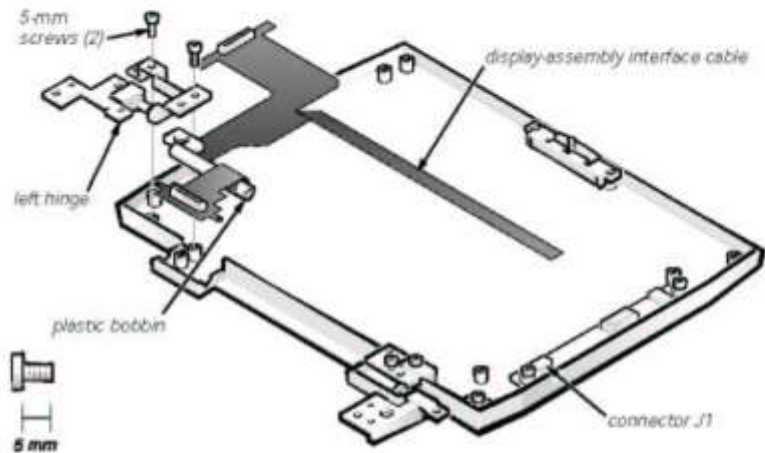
Display-Assembly Interface Cable Removal (12.1-Inch Display Shown)
